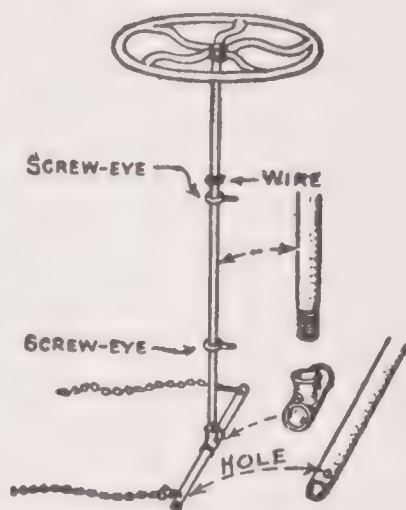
Details of a Sewing-machine Wheel and Gas-pipe Steering wheel.
